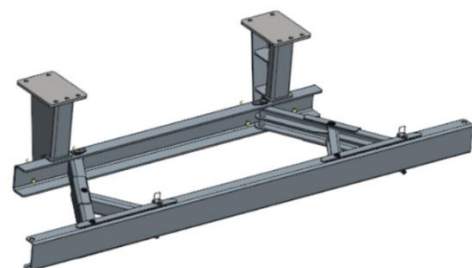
Sliding Rear Underride Protection Device 3D Design
